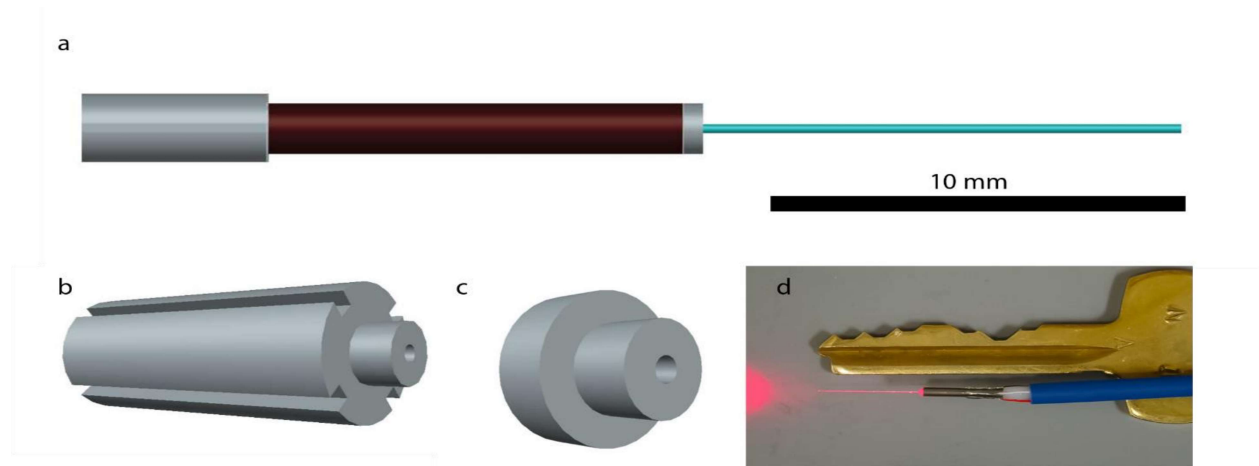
AutoCAD model (a) Complete probe (b) lower mount having a groove for PZT wire take out (c) front mount used for coupling PZT with fiber cantilever (d) Actual fiber probe.
